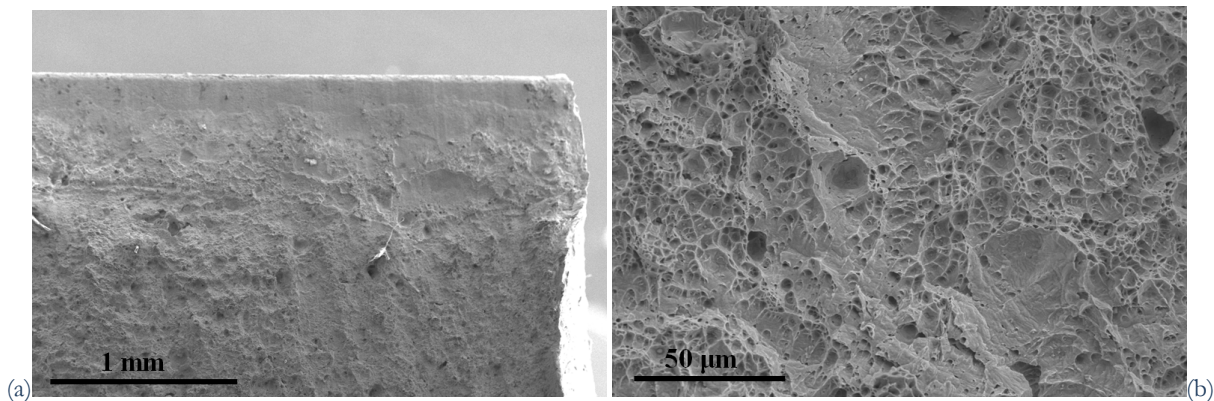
Fracture surfaces of TWIP/DP welded joint. Fracture in the HAZ of DP steel. Macroscopic (a) and microscopic (b) views.
